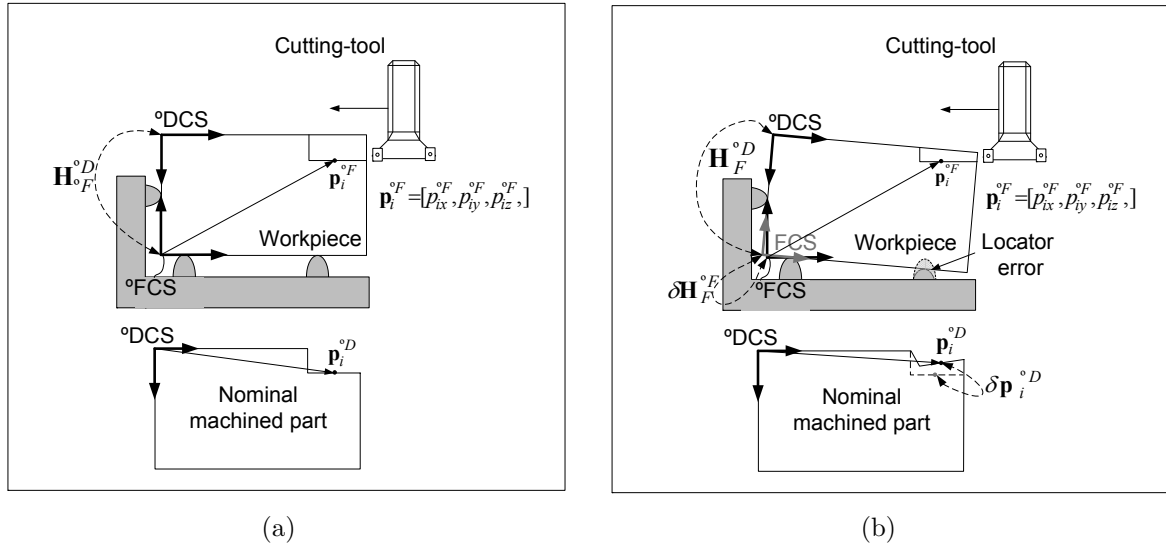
Example of fixture errors: (a) nominal conditions, (b) conditions with fixture errors.
